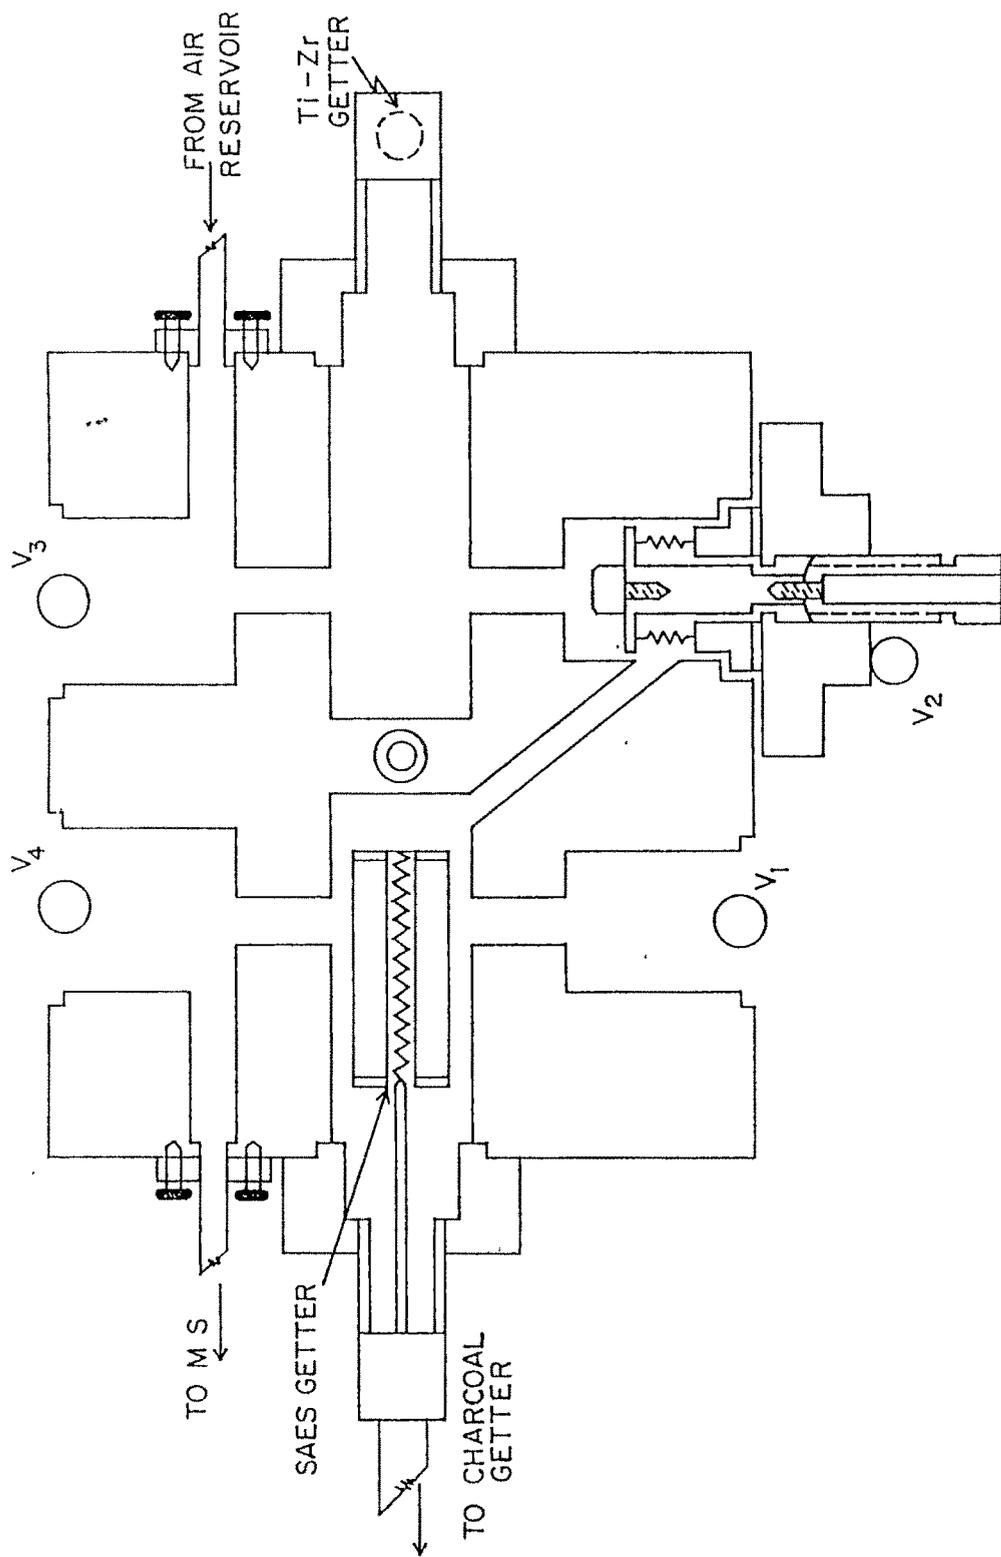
Middle Section of the S-S Block with Only One Valve Assembly
